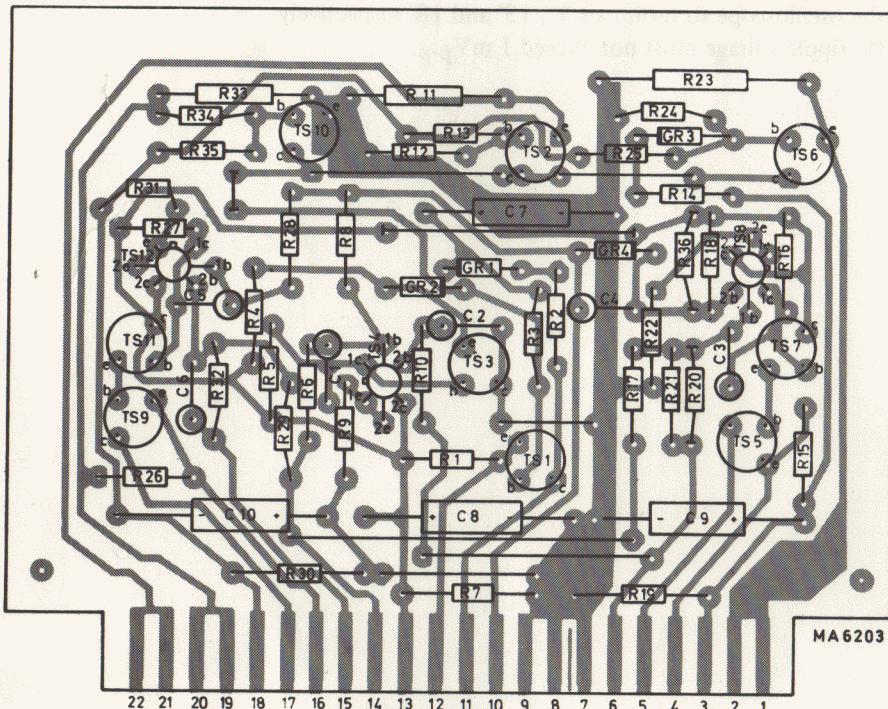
Printed wiring board, voltage regulator, unit 1
